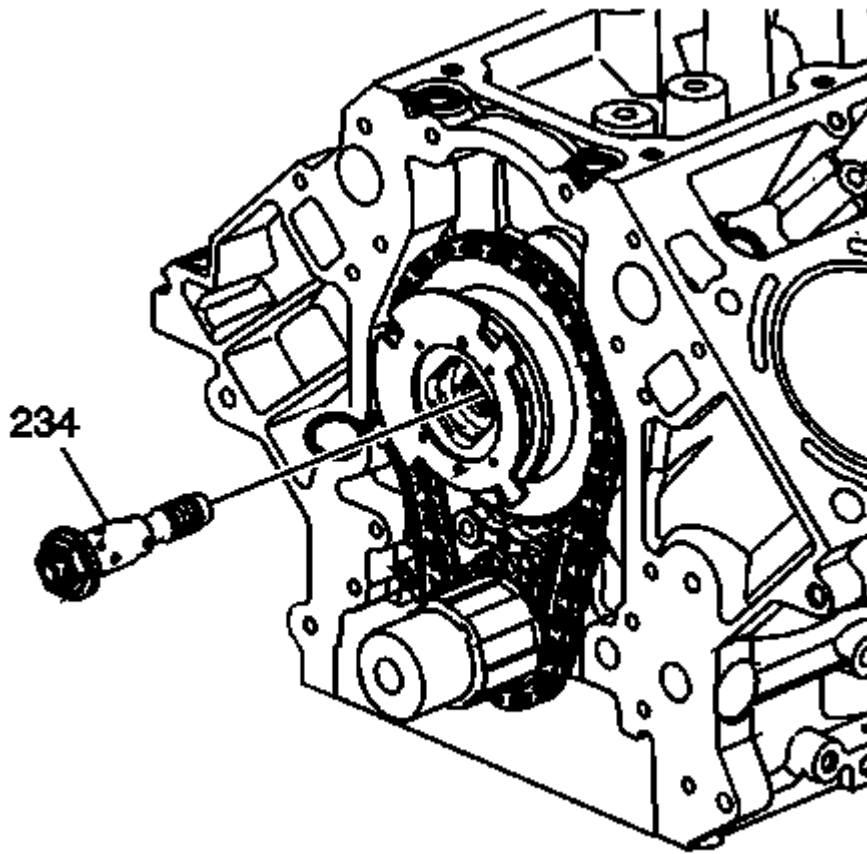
View Of CMP Actuator Solenoid Valve
